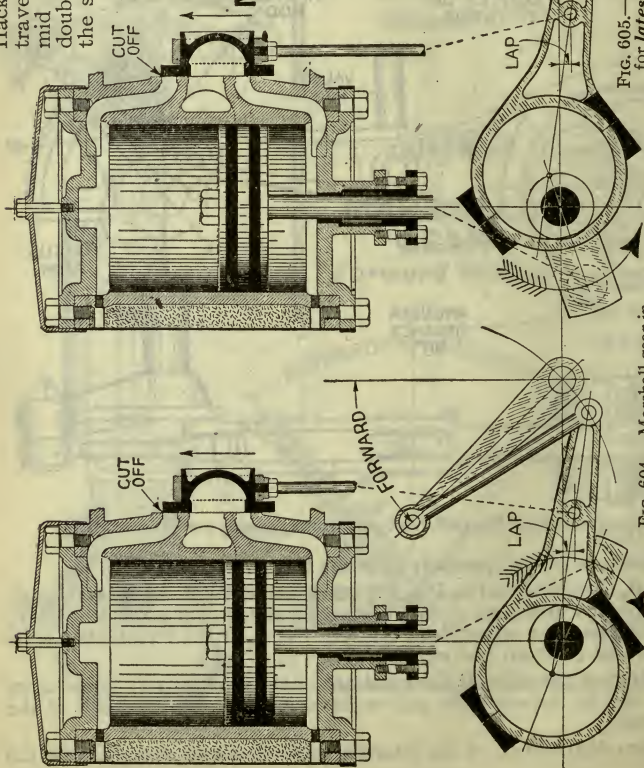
Marshall gear in cut off position for latest cut off; reverse gear.
